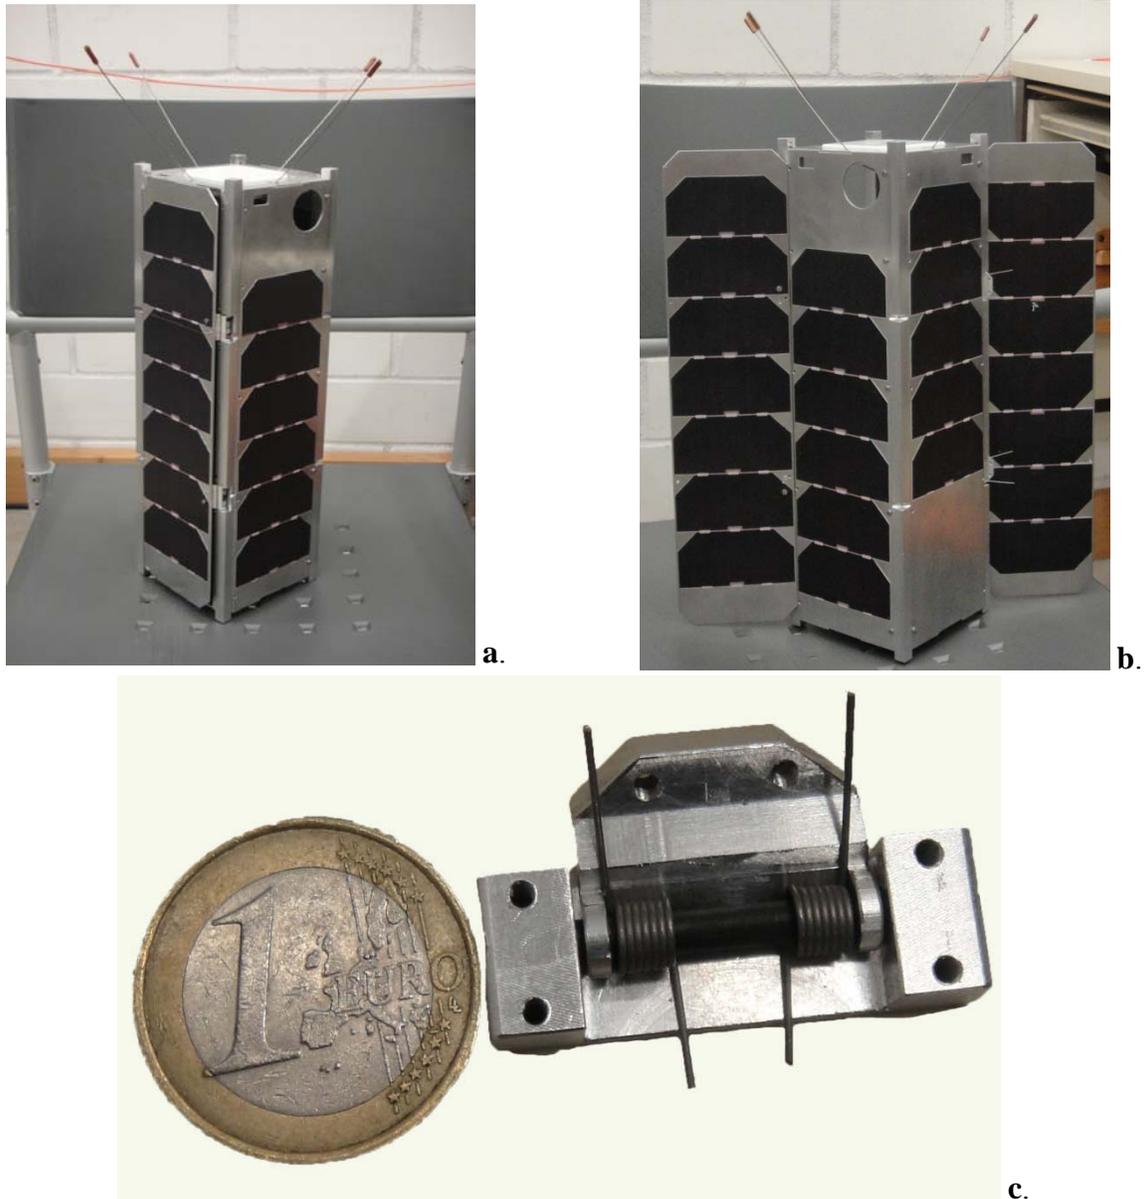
a. Stowed position of the Satellite using fishing line; b. Deployed position of the panels at 135°; c. Assembly of torsion springs, lever, rod and socket
